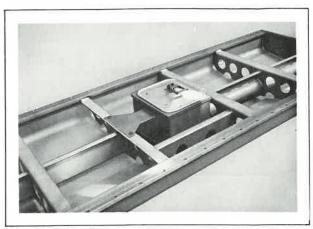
ENGINE OIL PAN WITH STRAINER COMPLETELY ASSEMBLED.
